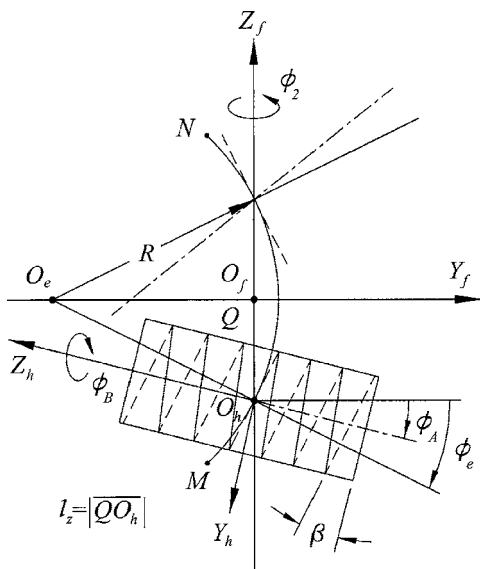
Generating method of a curvilinear-tooth gear cut by hob cutters
